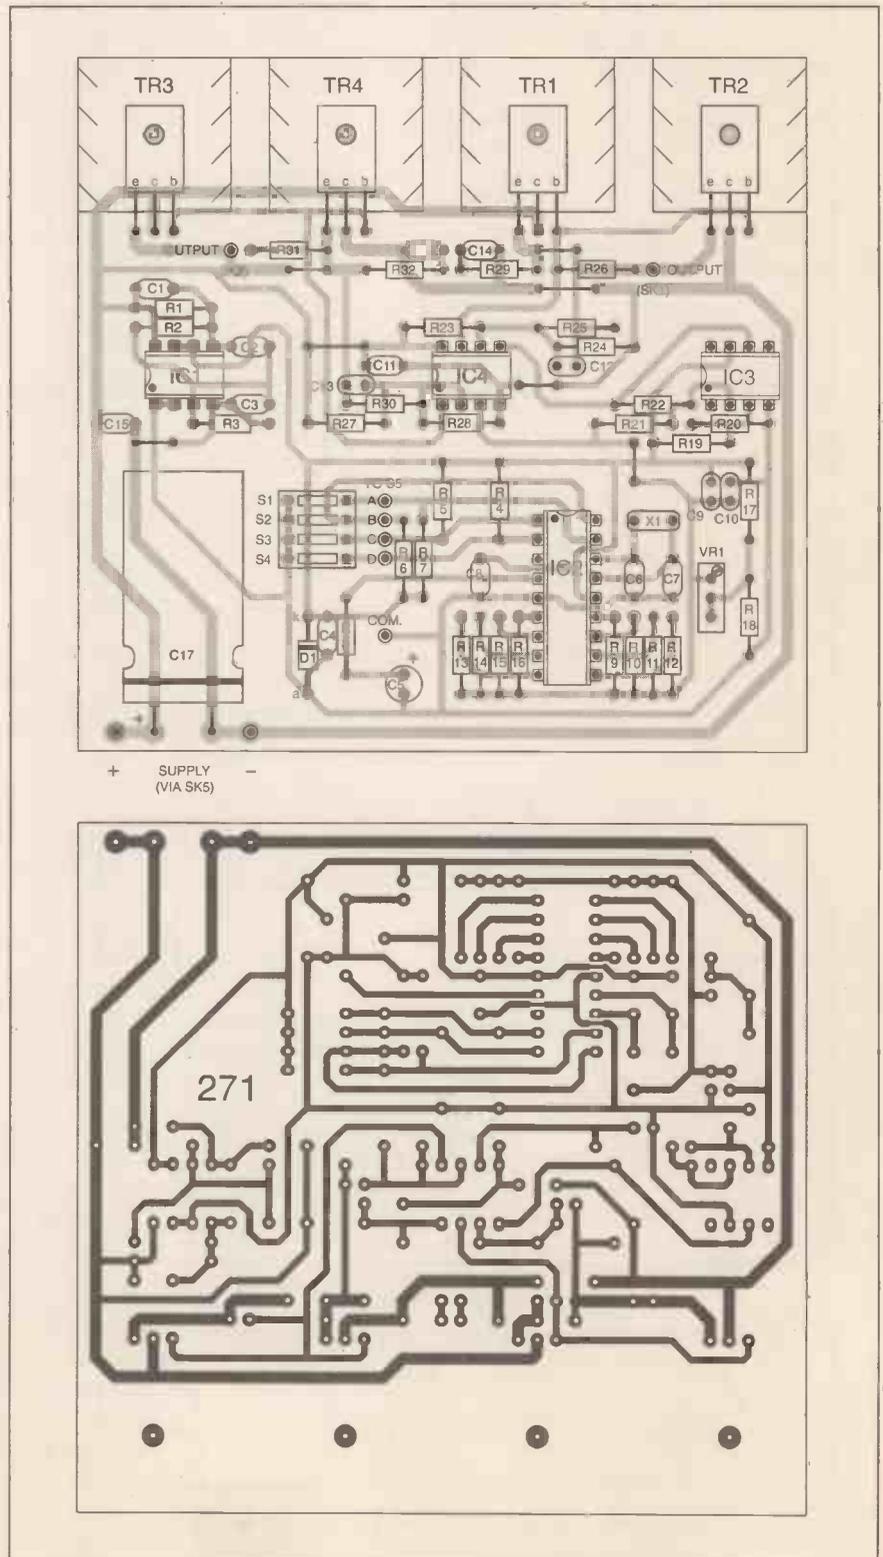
Printed circuit board component layout and full size underside copper foil master pattern.
